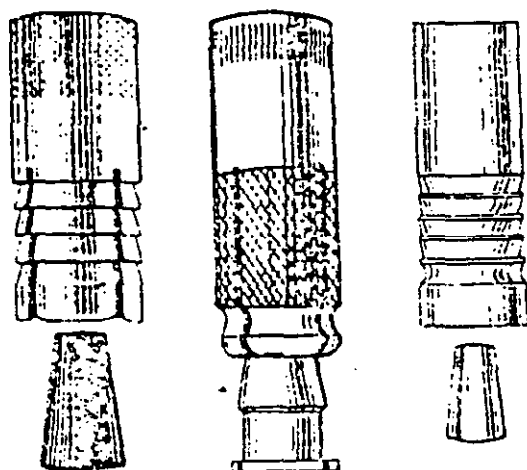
Group VIII, Type 1, Expansion anchors, internally threaded
